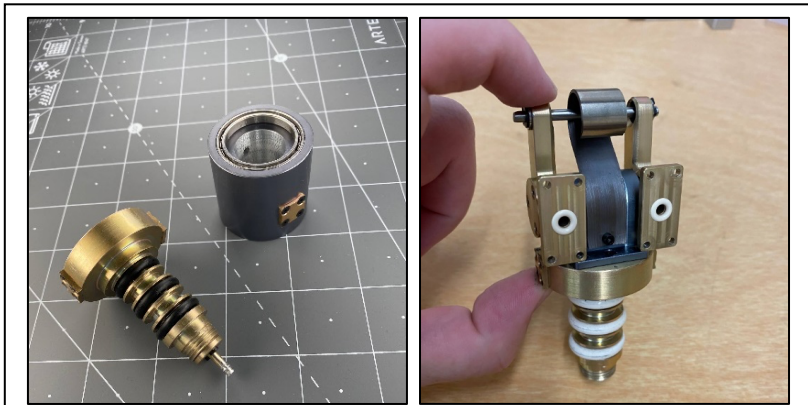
The compact ATA rotary fluid joint (Left) and (Right) a secondary axis fluid joint with a contorque spring deployment mechanism mounted above the rotary joint.
